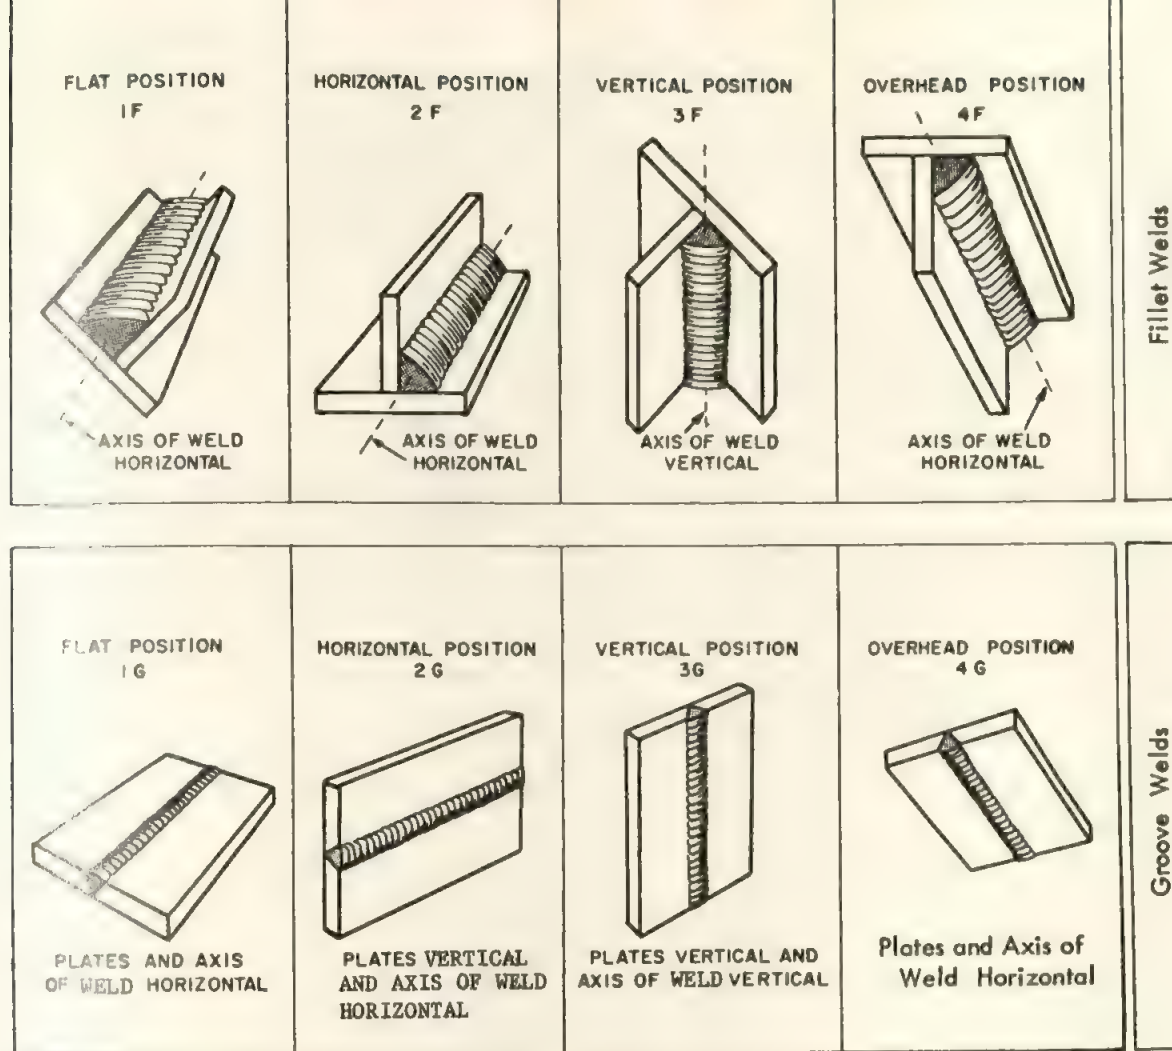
Welding positions for fillet and groove welds.
